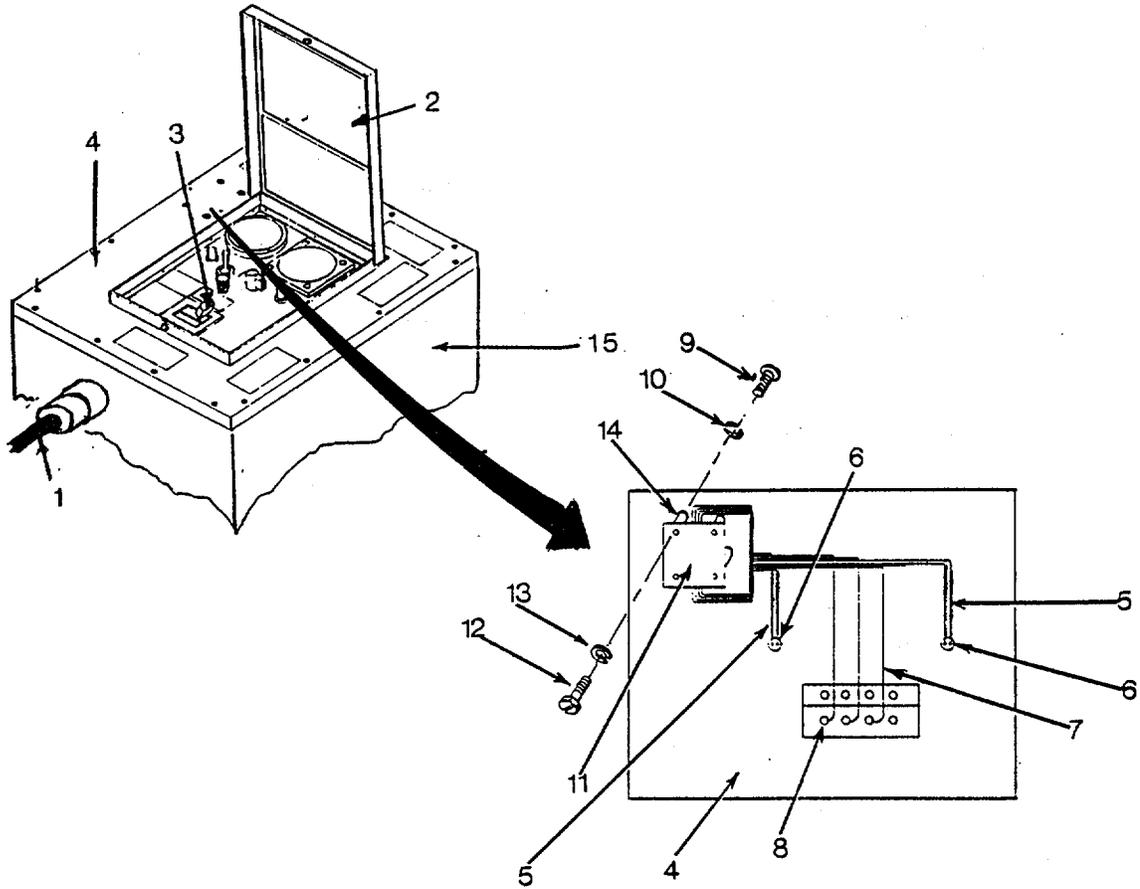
Replacing Circuit Card Assembly, Power Distribution Box Assembly
